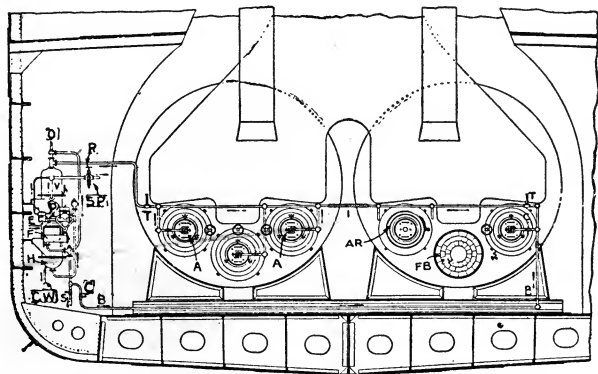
,382. *Koerting* oil burning installation for Scotch boilers. The outfit comprizes: A, centrifugal oil sprayer; B, circulating line of heating; C, Cock; E, exhaust of pump; F, filter; H, oil heater; O, safety valve; P, steam pump; R, reducing valve; S, oil supply line; T, thermometer; V, air vessel; AR, air register; CW, condensed water; FB, fire brick; SP, steam pressure line. The full section of the furnace is used, the grate being unnecessary. Therefore there is a gain in heating surface. The heating and resulting expansion is equal, and all the water surrounding the tubes is correspondingly heated. The short fire clay lining in the furnace serves as a protection against the intense temperature of the oil flame, and enables the boiler to be readily set to work after a short interruption; the oil ignites on the incandescent fire-clay.
